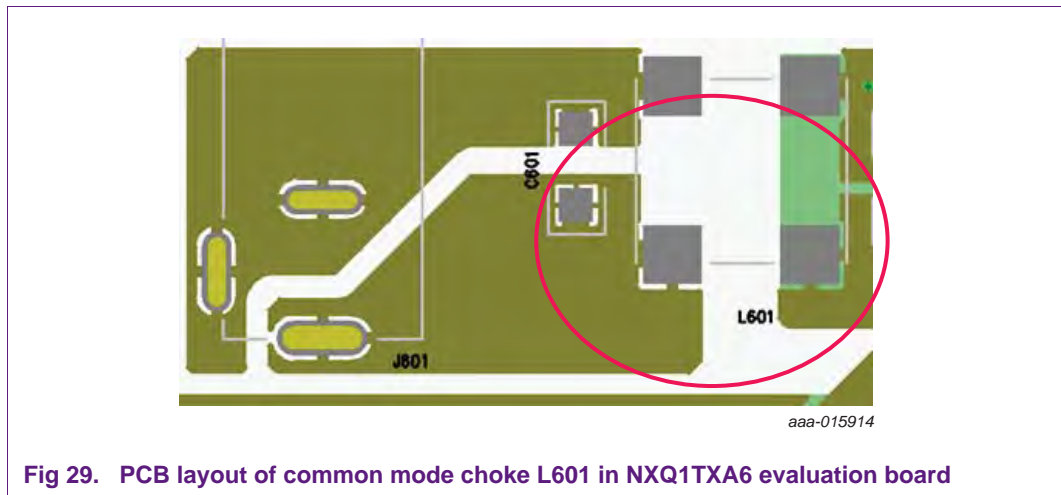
PCB layout of common mode choke L601 in NXQ1TXA6 evaluation board
